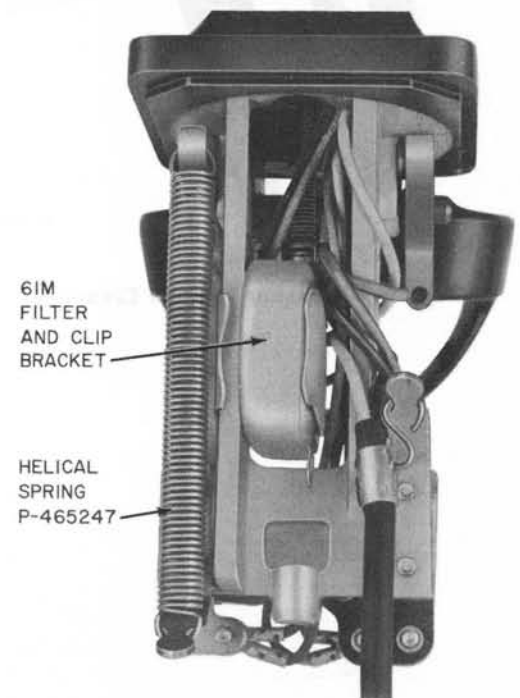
Assembly of Filter on G-Type Handset Mounting
